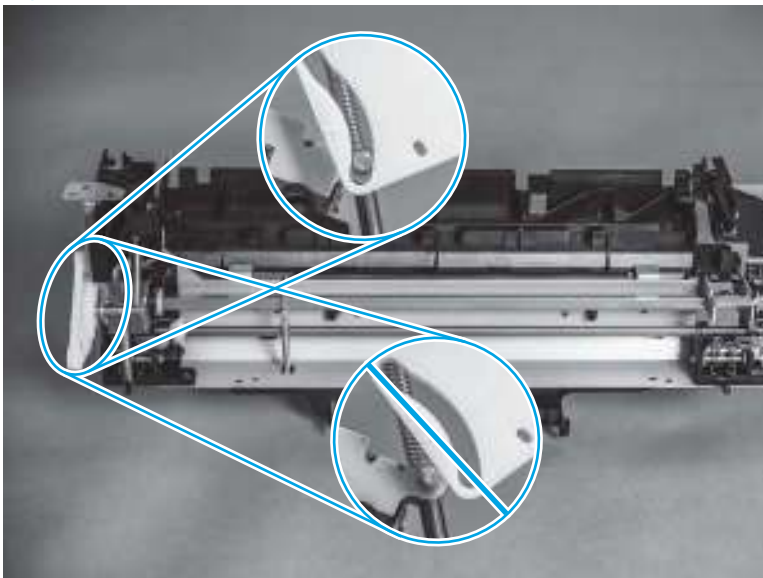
Remove the cartridge-lifter assembly (M830; 14 of 14)
